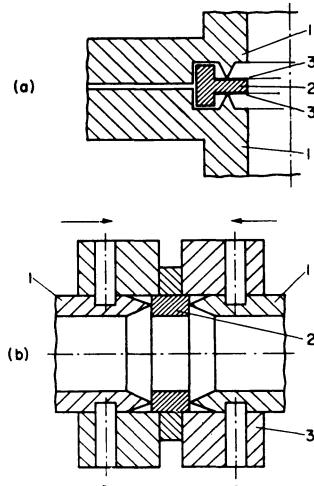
Seals with knife edges facing each other: (a) seal with machined gasket: (1) flanges; (2) copper gasket; (3) indium coating (after Reynolds¹⁰⁴⁹); (b) pipe butt seal: (1) heavy wall stainless steel tube; (2) copper gasket; (3) holding rings. After Pattee⁹⁷⁵ (*Courtesy of The American Institute of Physics*)
